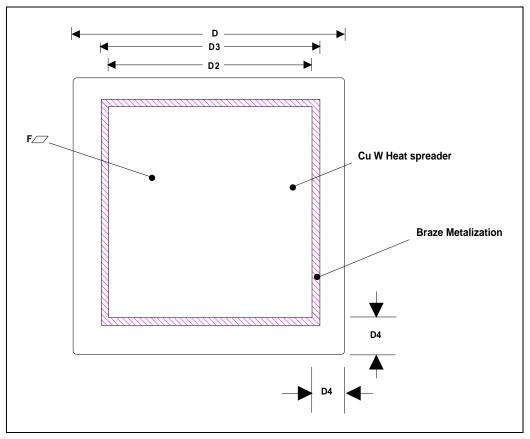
Pentium® Processor (510\60, 567\66) Package Dimensions (Top View)
